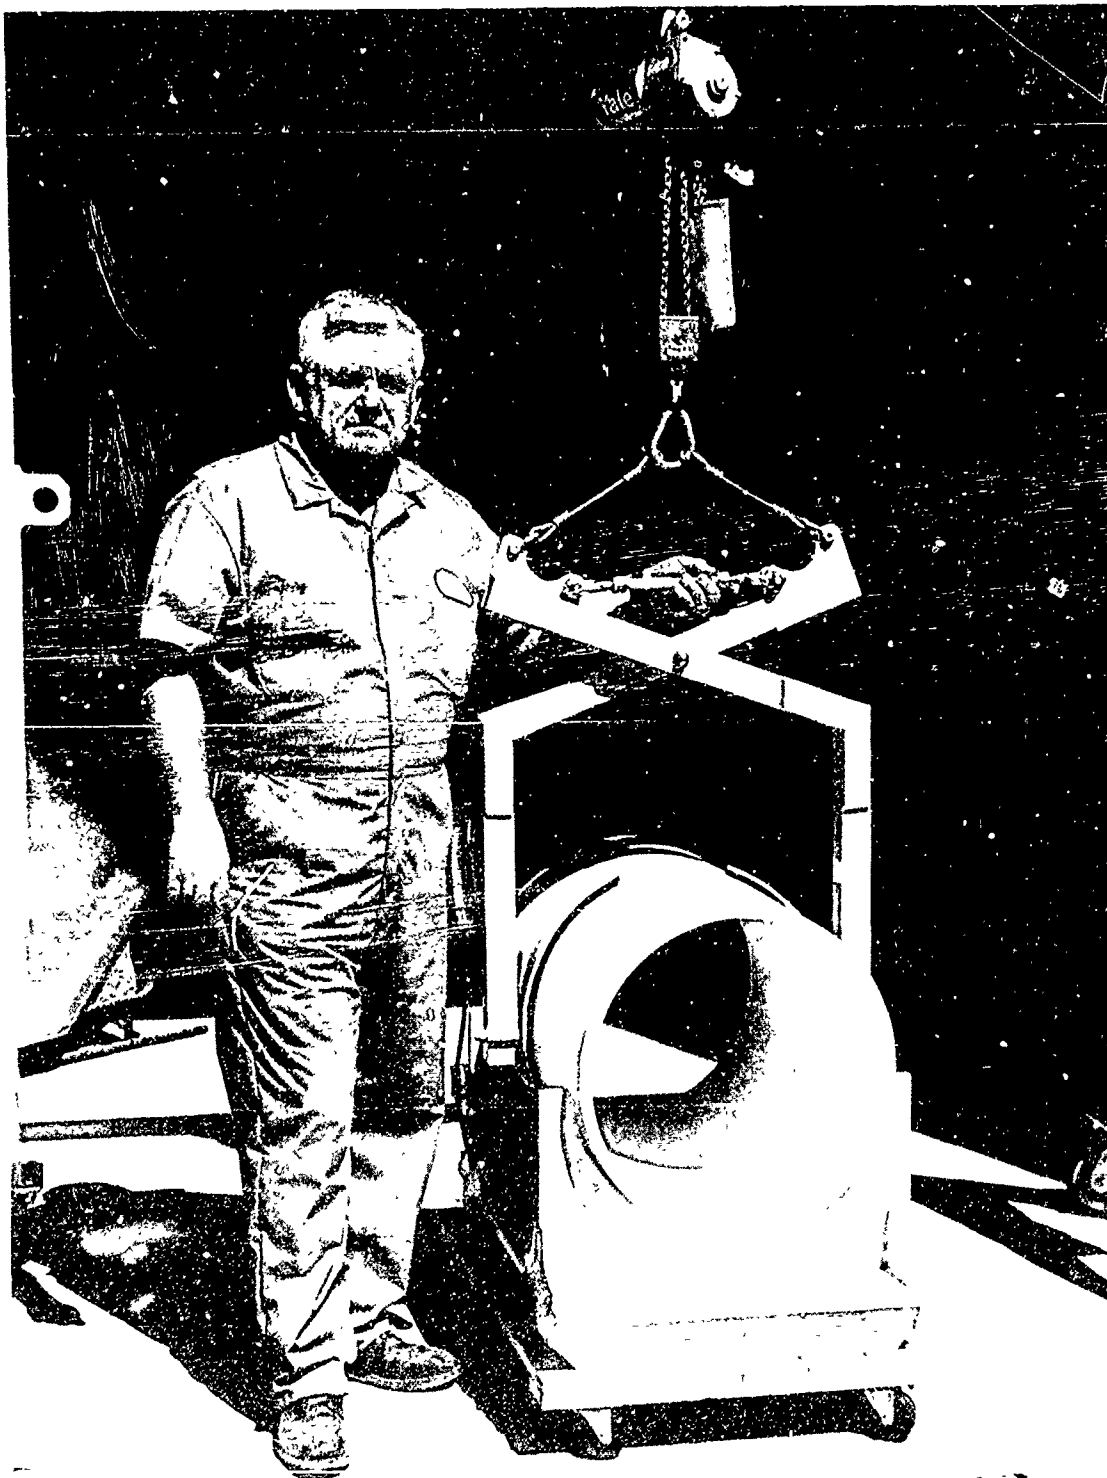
The 20-inch-diameter alumina cylinder and the fixture for handling it during installation of metallic end caps.
